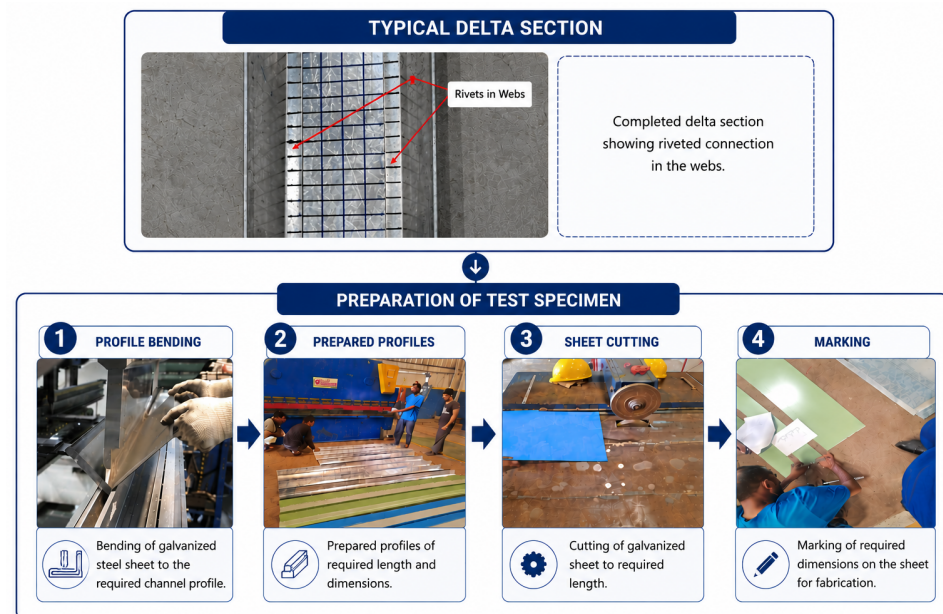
Fabrication process and assembly of the proposed Delta-Channel section.
